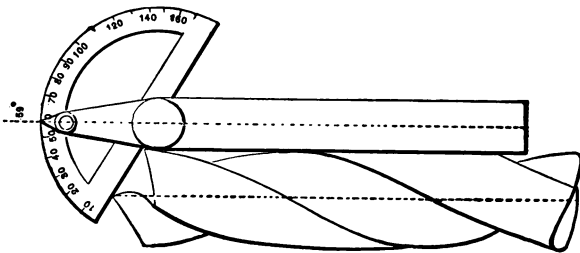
Gauging Angle of Cutting Edges of Twist Drills
